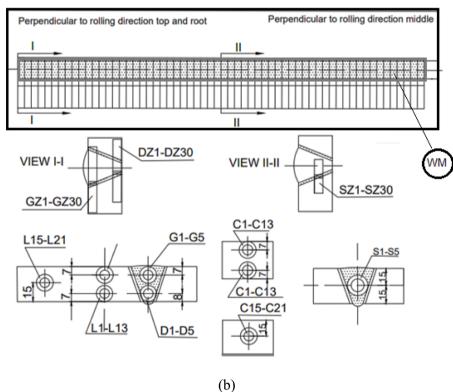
Sampling scheme of the Charpy specimens from the NIOMOL 490 K welded plate.
